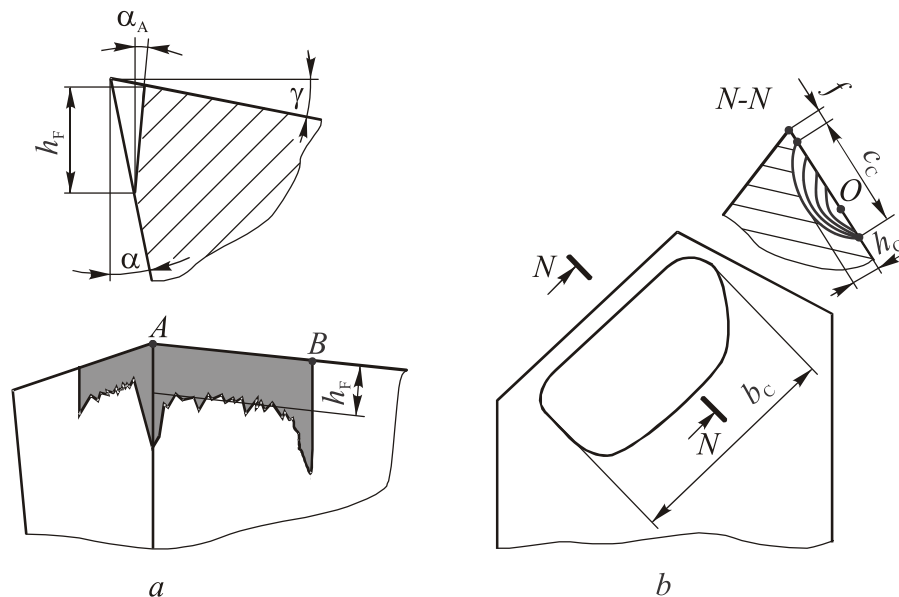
Types of wear: (a) flank wear; (b) crater wear
